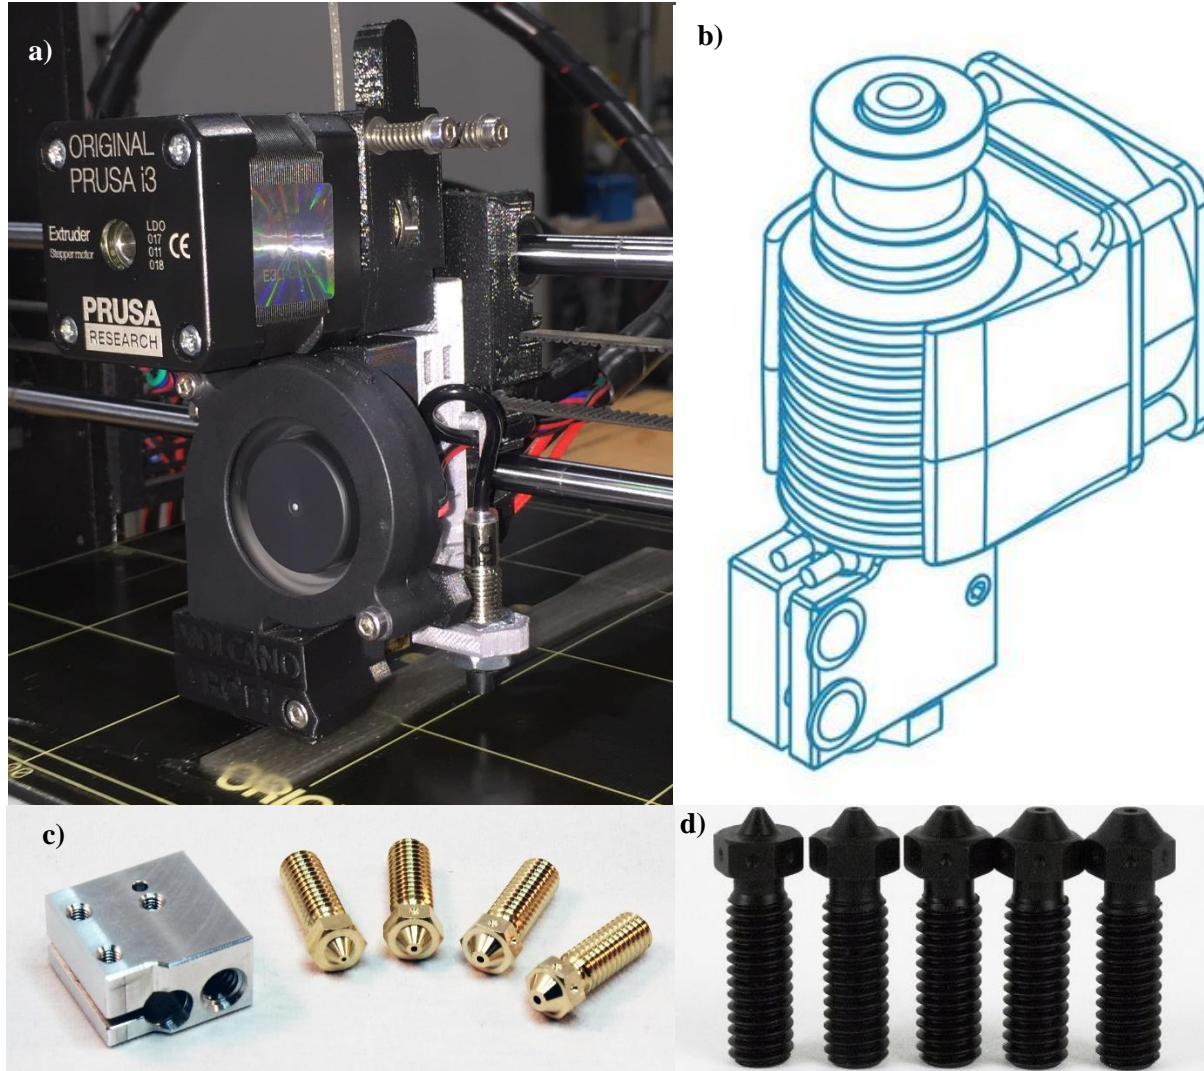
(a) upgraded hotend; (b) schematic; (c) heating block; and (d) steel nozzles. [12]
